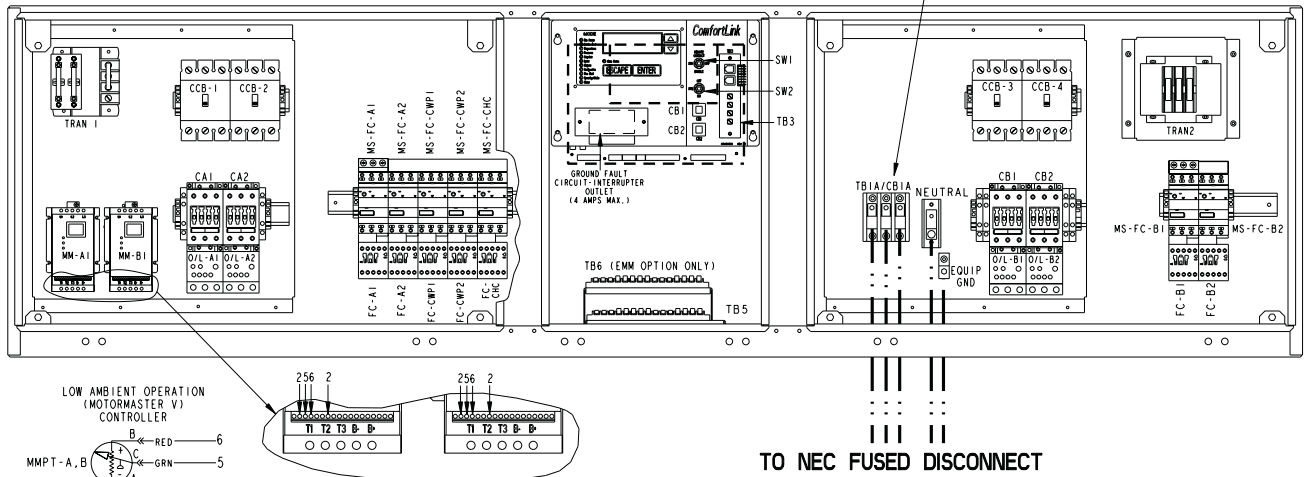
Typical Control Box for 30RA032-055 (042-055 Shown)
